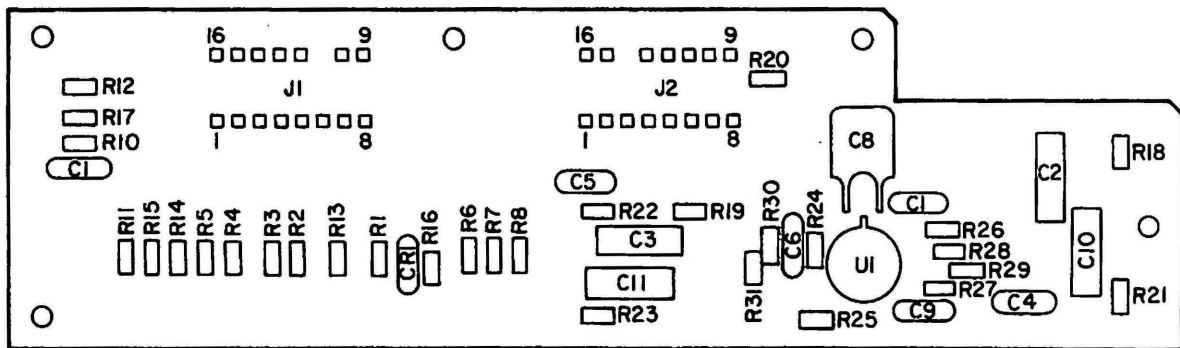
VAC-Ion Regulator and Cesium Beam Interlock Board Assembly A24, Parts Location Diagram
